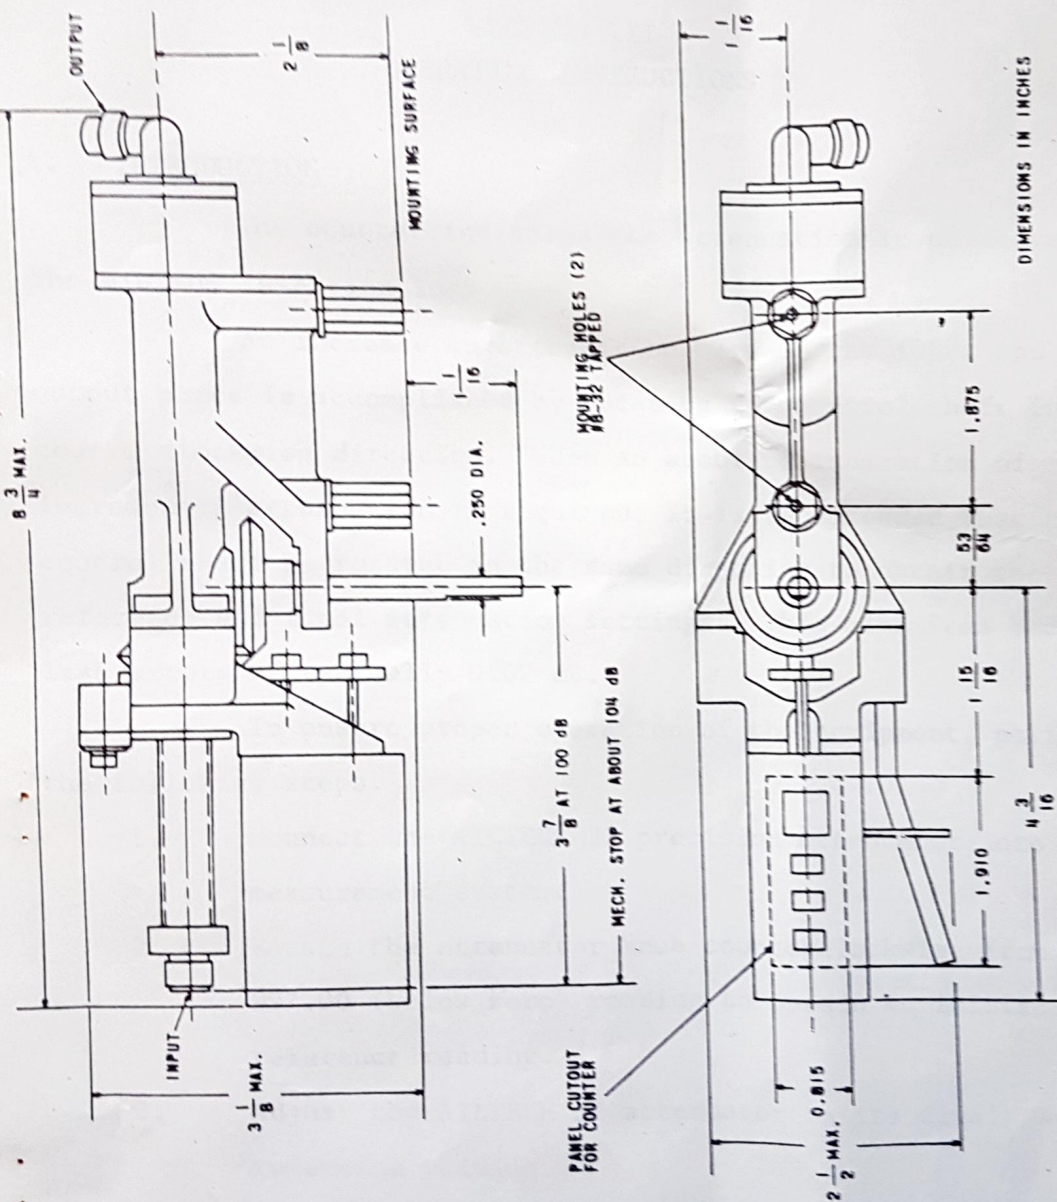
OUTLINE AND MOUNTING DIMENSIONS
